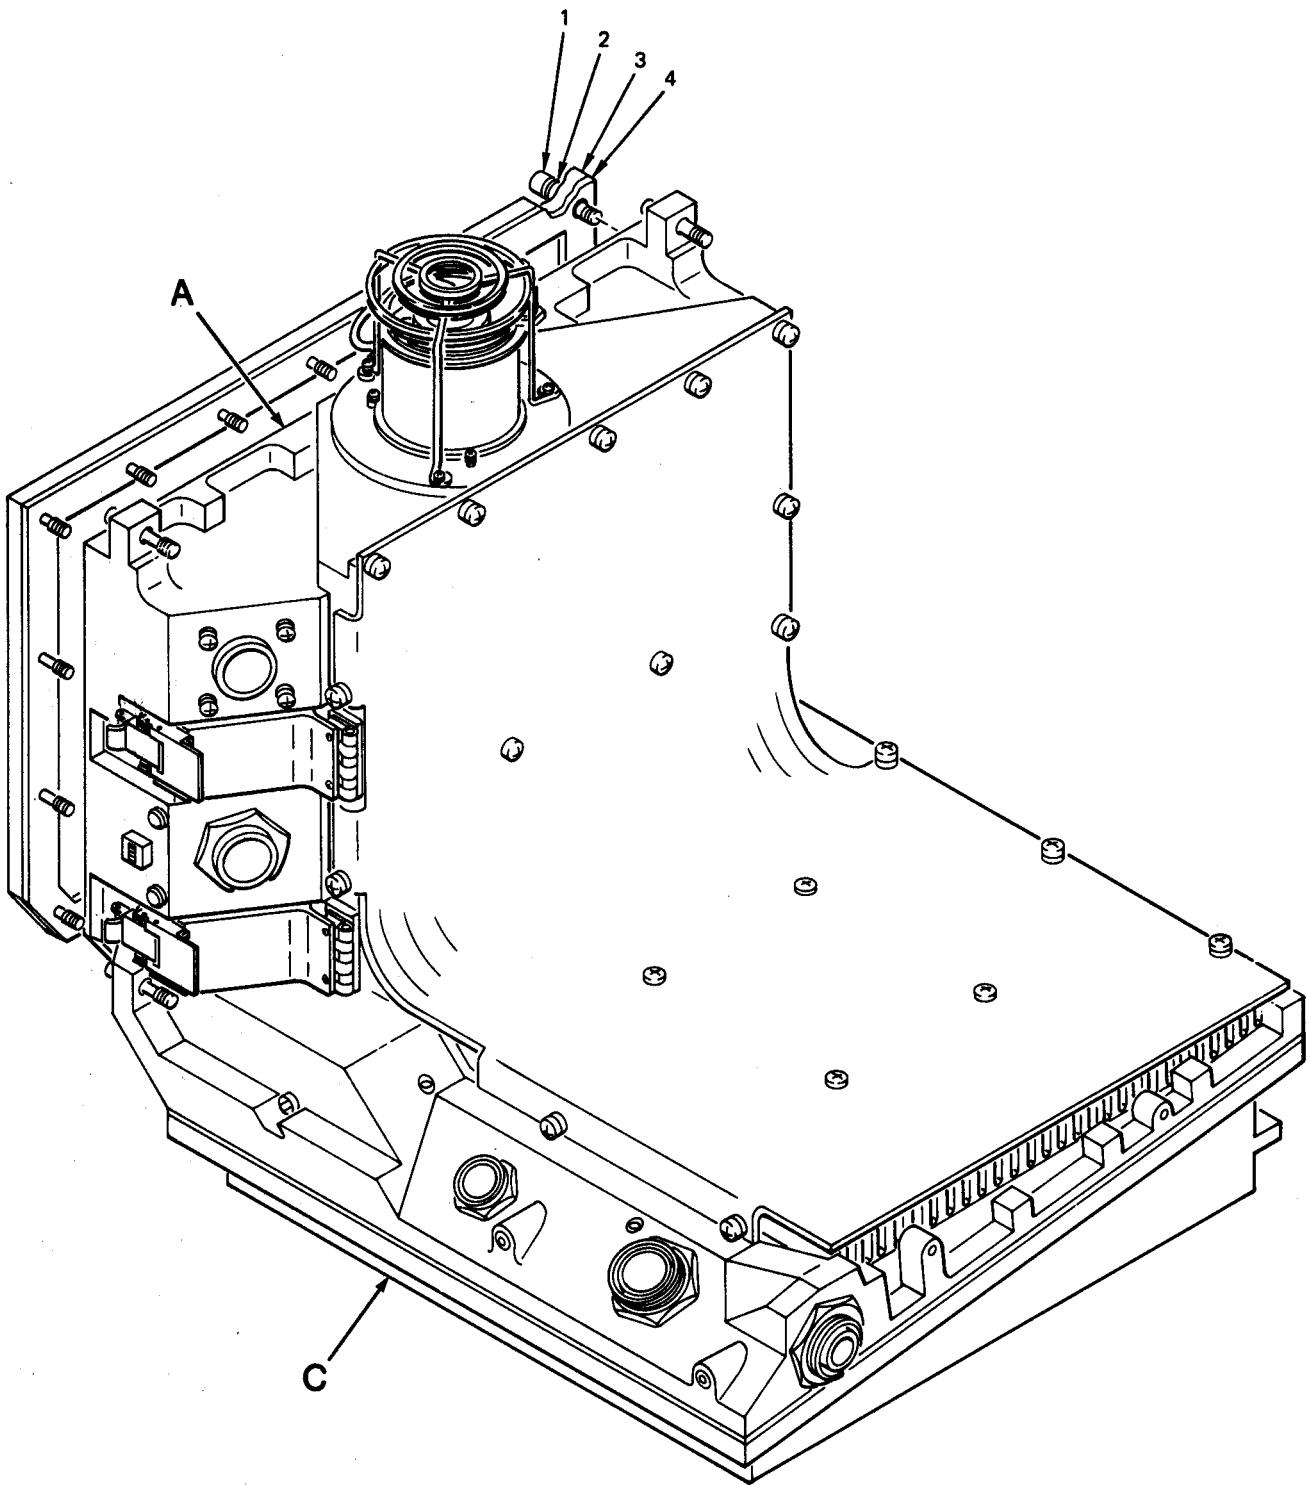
Power Supply Exploded View (Sheet 1 of 3)
